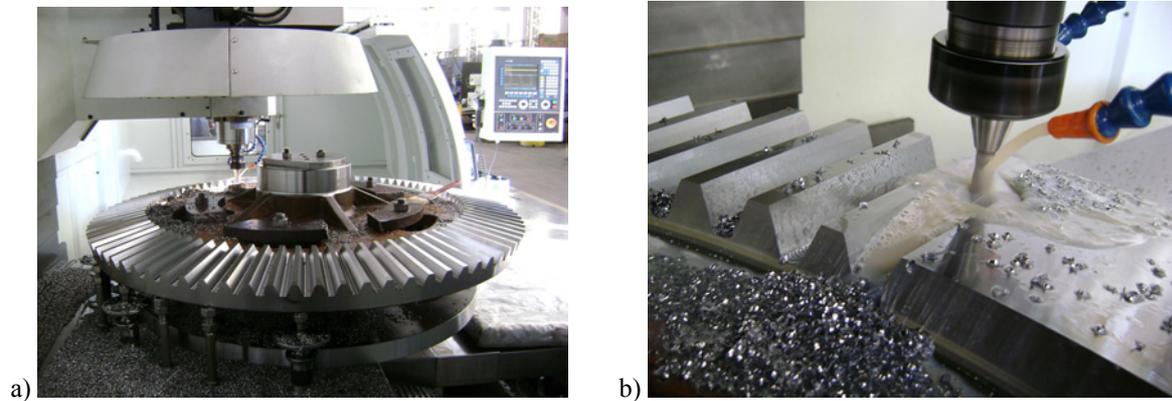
a) Machining Center Travis M2000; b) Installation of the tool.
